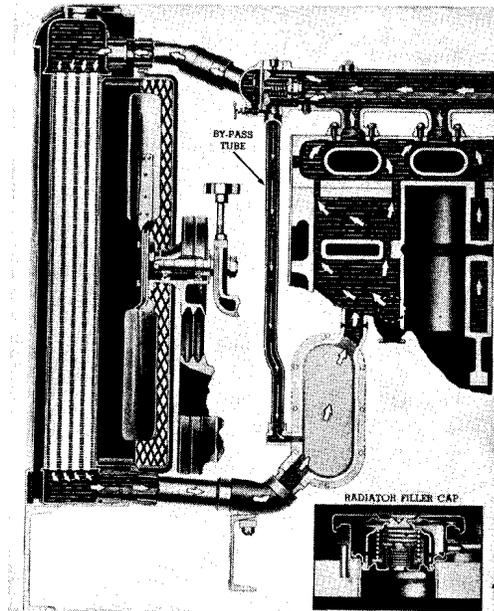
Typical Cooling Arrangement with Radiator and Fan.
